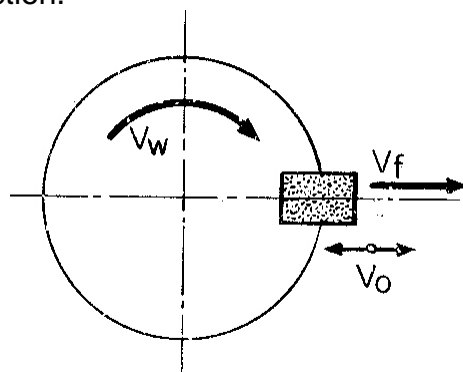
superfinishing of end face of a cylindrical work piece in radial mode
